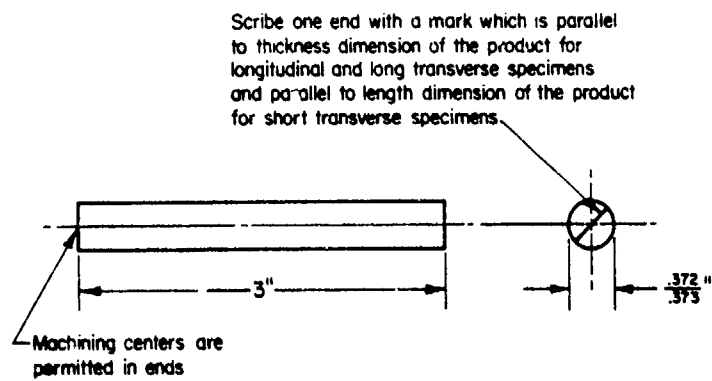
"Amsler" shear specimen for 7149-T73 hand forging.
